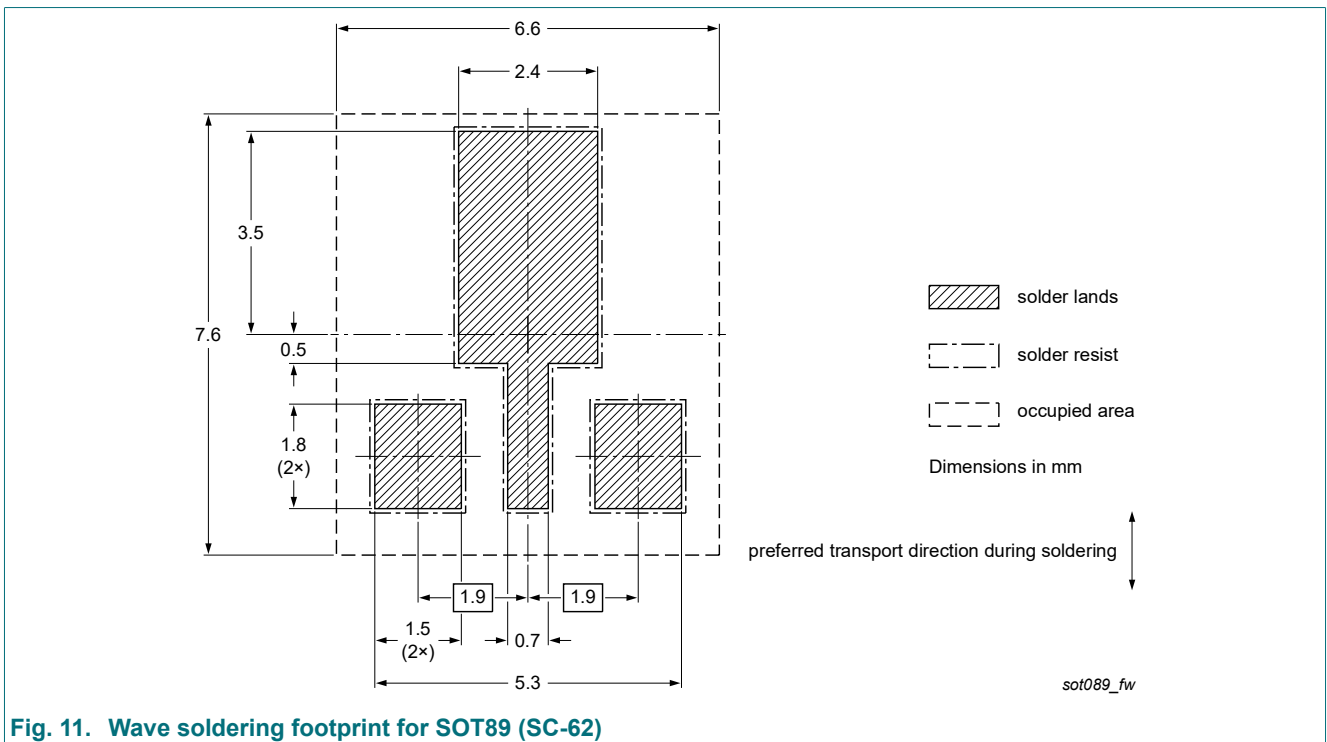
Wave soldering footprint for SOT89 (SC-62)
